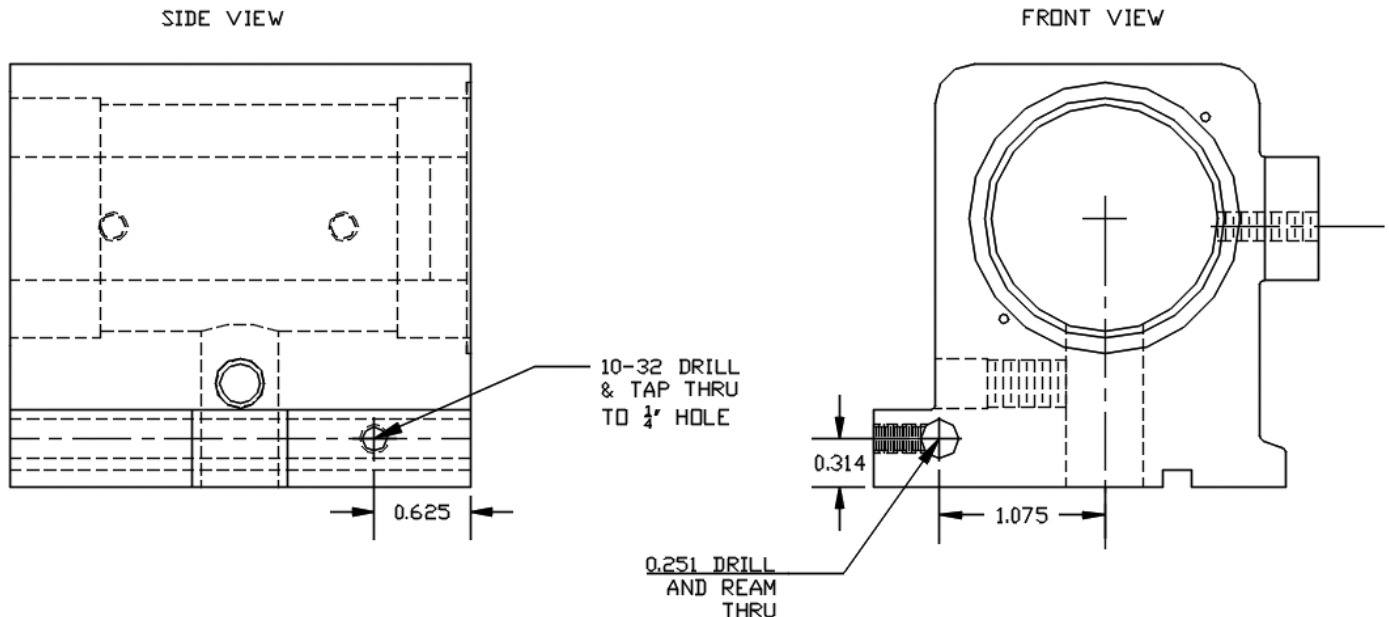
Shows where to drill holes for the rods, and the thumbscrew.
